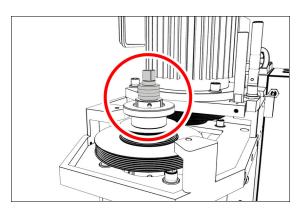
Drawbar assembly installed in the spindle motor cabinet.
